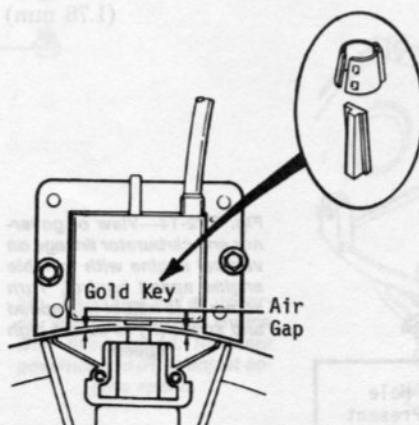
On solid-state ignition system, set coil lamination air gap at 0.0125 inch (0.32 mm) at locations shown. Ignition module will be marked (arrow) to indicate color of flywheel sleeve (S) or crankshaft key (K) that must be installed.
